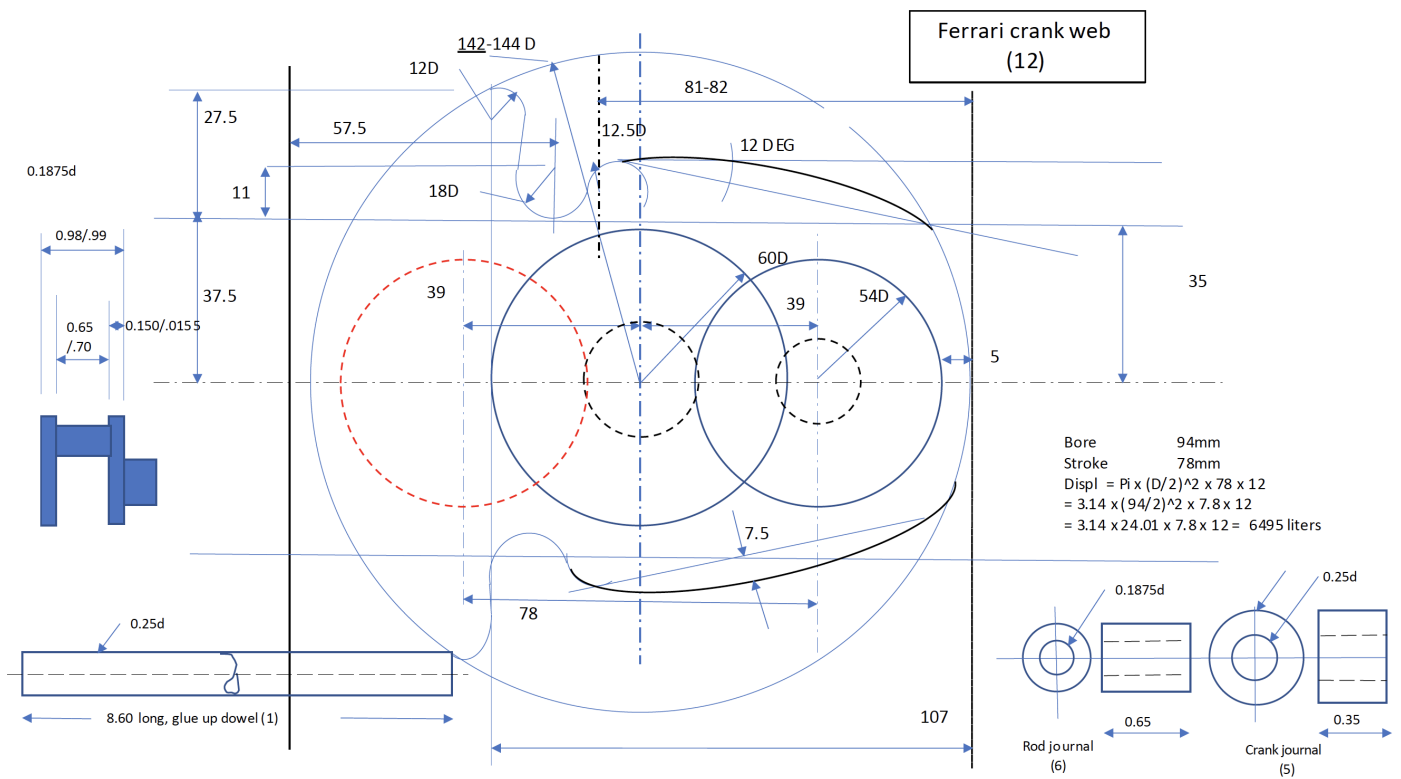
Ferrari web drawing, rod journal, and crank journal.
